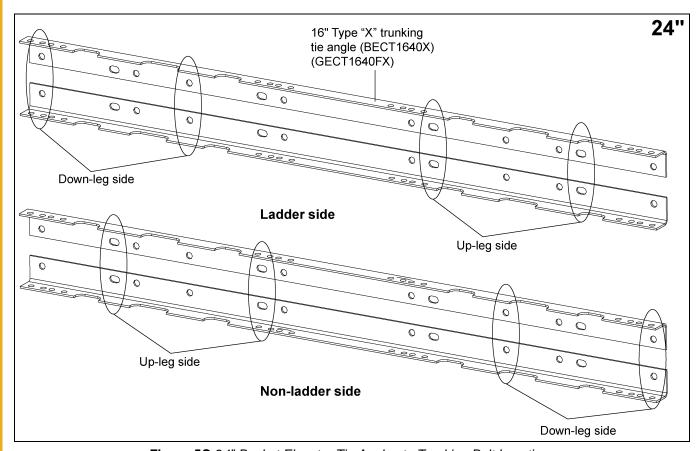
C 24" Bucket Elevator Tie Angles to Trunking Bolt Locations
